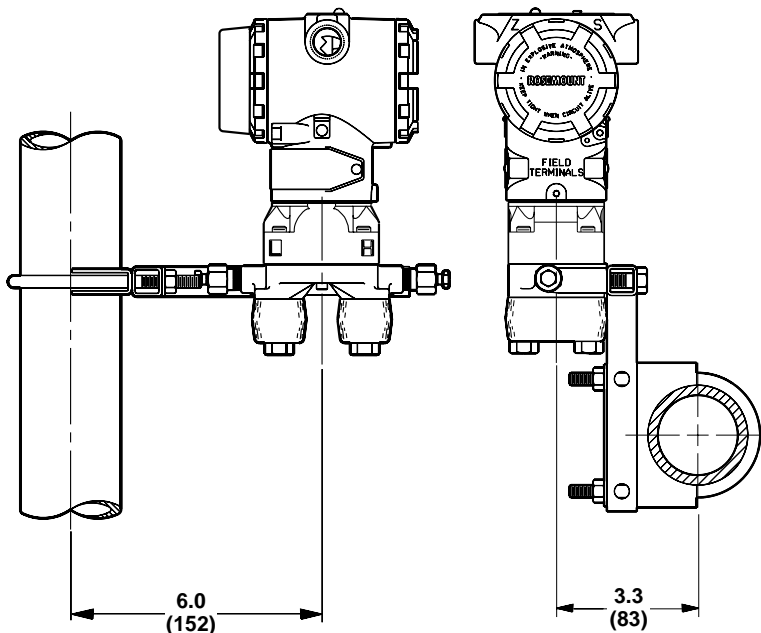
Coplanar Flange Mounting Configurations with Optional Bracket (B4) for 2-in. Pipe or Panel Mounting.
